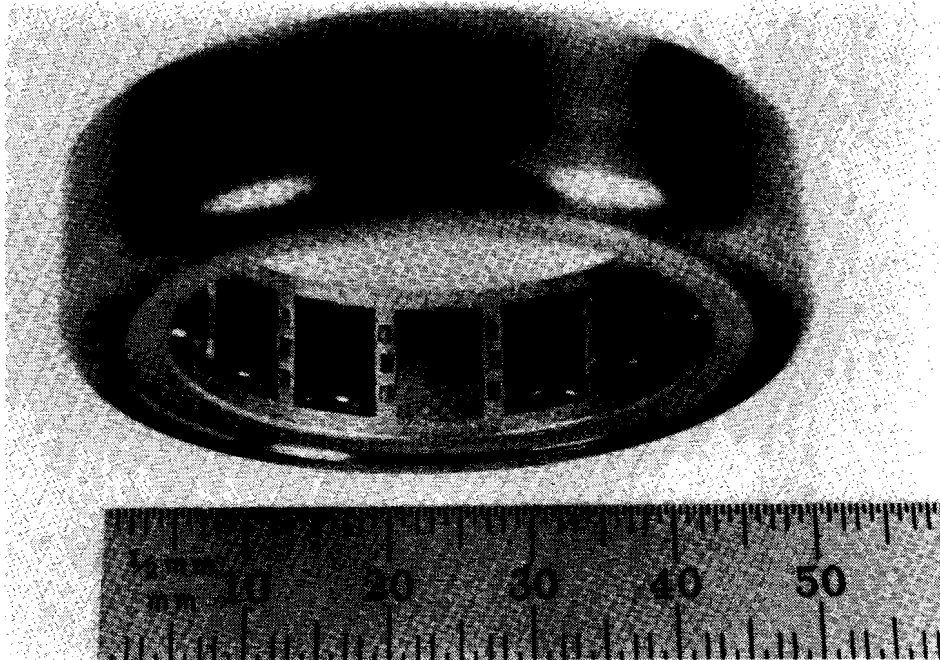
90-Degree Gearbox -411 Bearing Outer Race C/D Fault,
